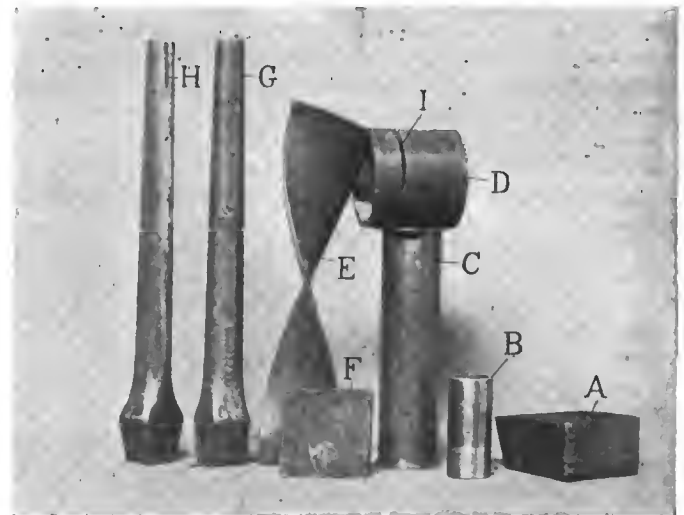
A, pressed steel forming a cup, showing rough-welded and finished edges. B, steel, copper and brass tubing welded together. C, thin copper tube made from a sheet. D, cast iron pipe cut off at ends by the flame, the width of the cut, which is about 1-8 inch, being shown at 1. E, two strips of 1-8-inch sheet steel welded and twisted. F, section cut in 17 seconds from the end of a 2-inch bar of high carbon steel. G, spoke made of two pressed steel halves welded together. H, finished spoke.
